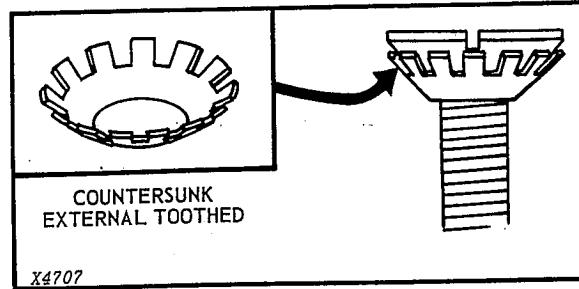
A Cone-Shaped External-Tooth Lock Washer
